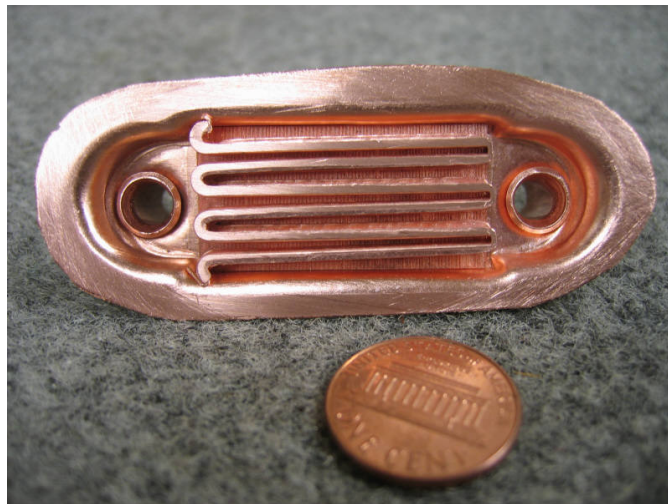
Picture of Partially Assembled Cold Plate Evaporator Module
